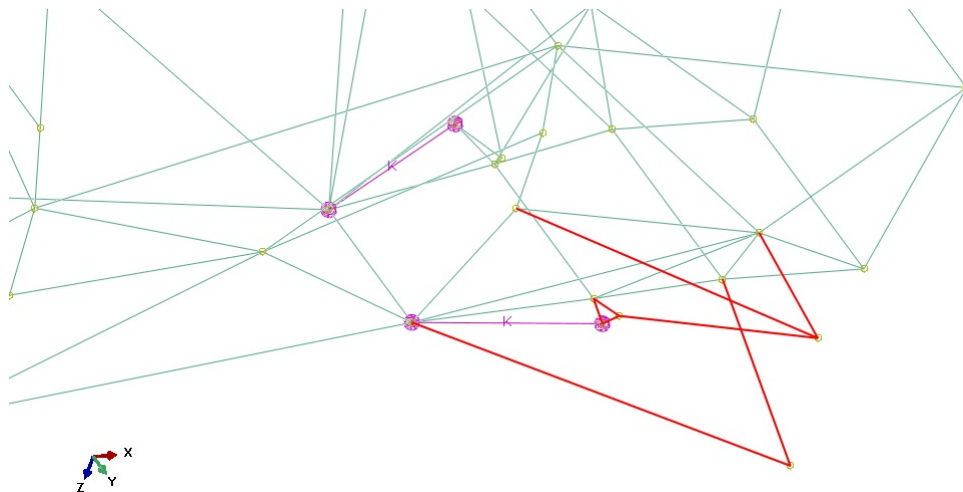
Isometric view with the front control arms and pull rod highlighted. The spring shown is connected to the frame.
